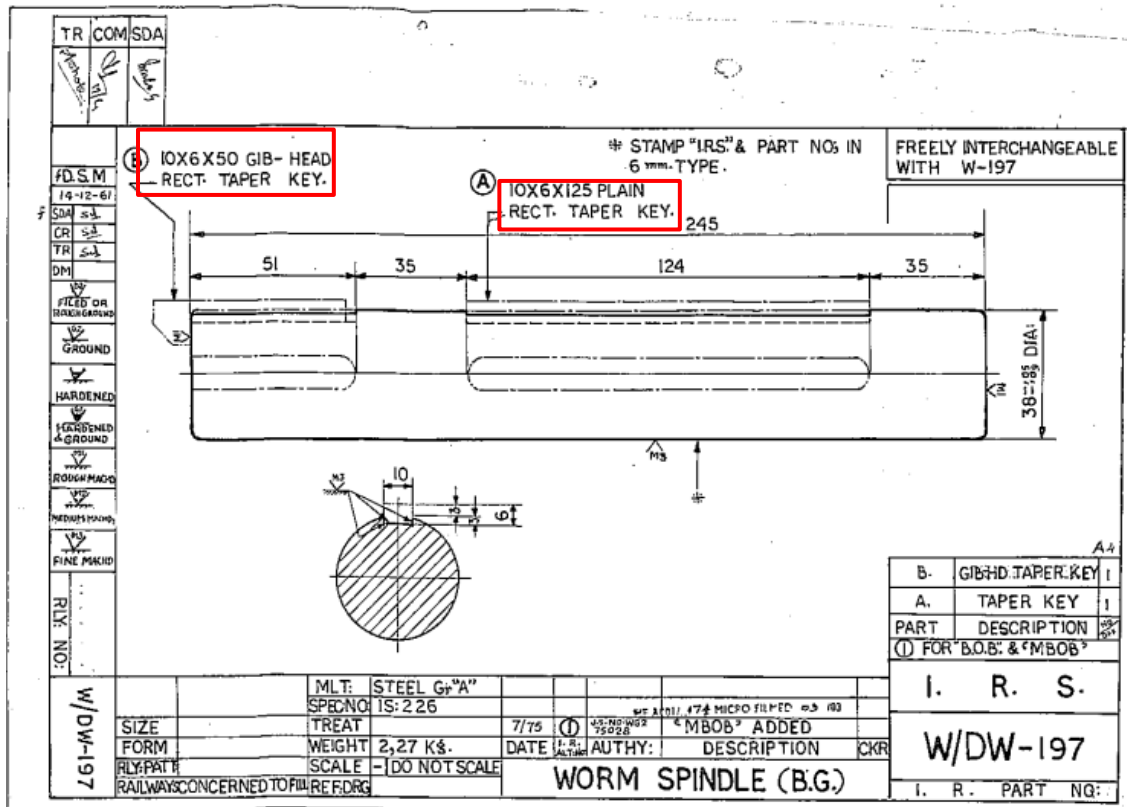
Drawing W/DW-197 showing Gib-Head Rect. Taper Key & Plain Rect. Taper Key
